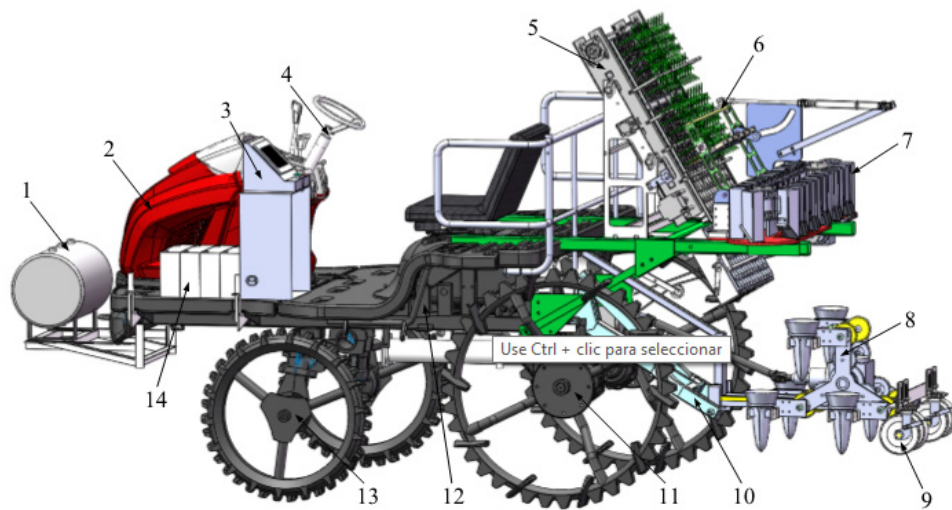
The structure schematics of the riding-type fully automatic transplanter: 1) air compressor; 2) engine; 3) control system; 4) operating system; 5) feeding mechanism; 6) pick-up mechanism; 7) rotation discharging mechanism; 8) planting mechanism; 9) soil covering ring; 10) hydraulic lifting mechanism; 11) driving wheel; 12) frame; 13) driven wheel; 14) battery.
